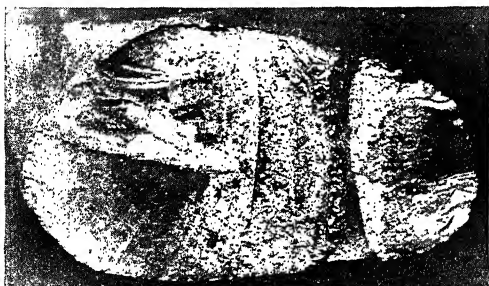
FRACTURE OF A STEERING ARM SHOWING FAILURE BY FATIGUE. X2.
